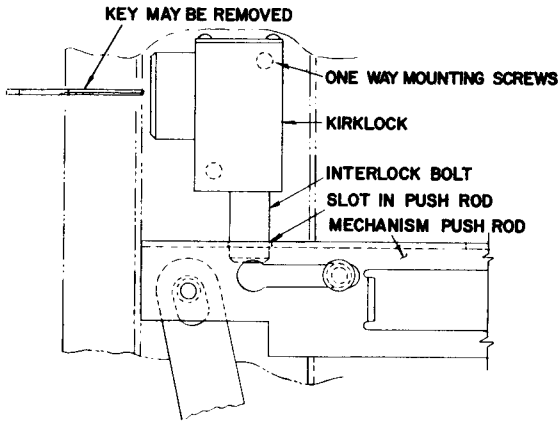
(0116B5047-0) Side View of Kirk Lock With Drawout Mechanism in the Disconnected Position
